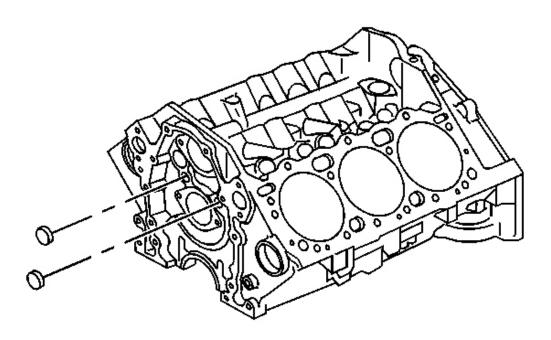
Front Of Engine Block Front Oil Gallery Plugs Or Balls Courtesy of GENERAL MOTORS CORP.
